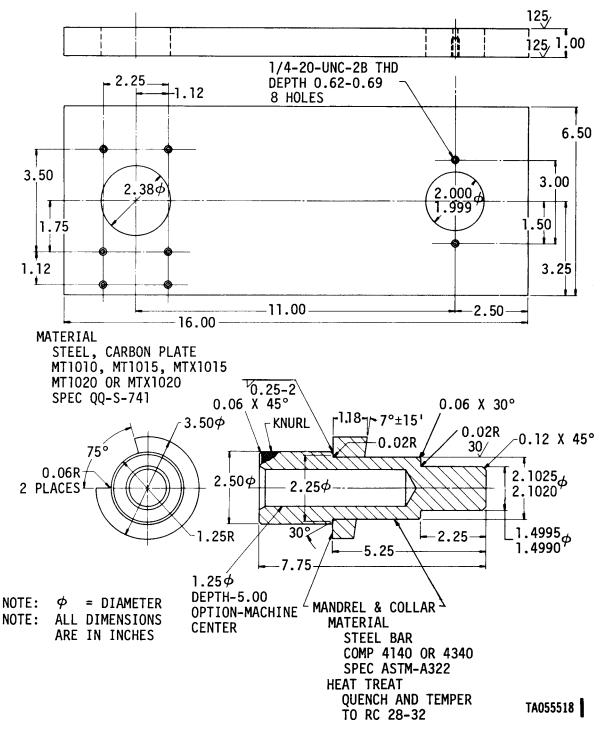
Improvised tool, plate and mandrel assembly.
